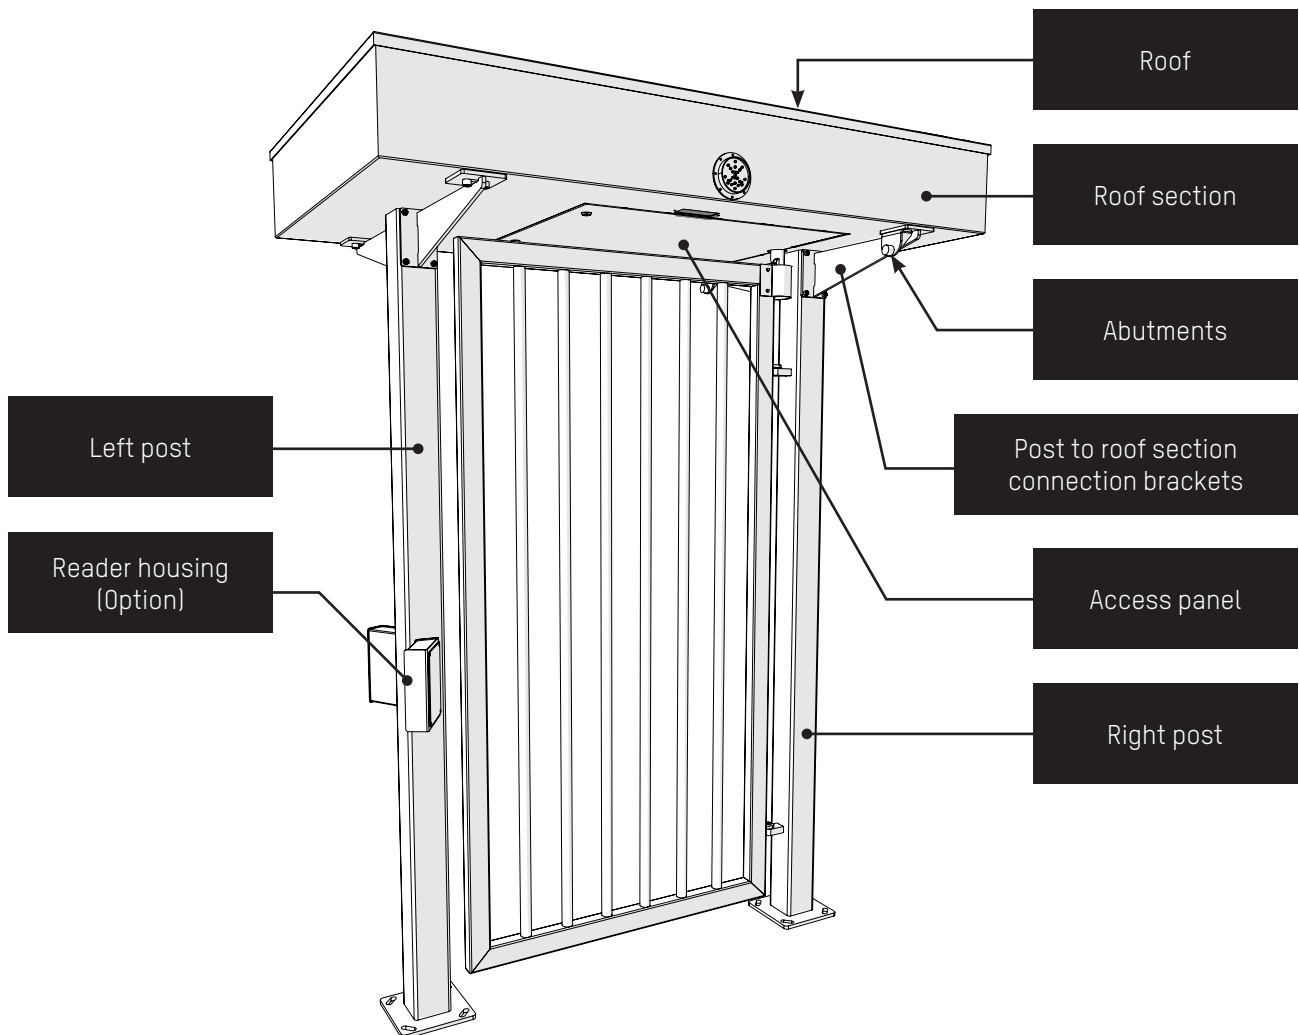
Sub-assemblies provided for in the packaging of the TRS PMR
